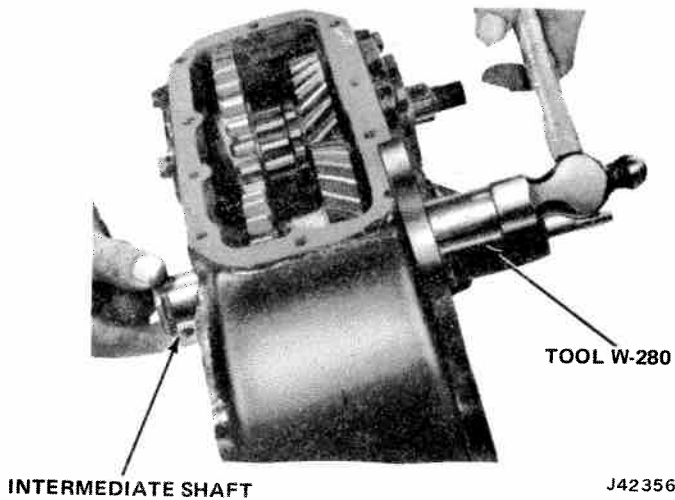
Intermediate Shaft Needle Bearing Aligner
